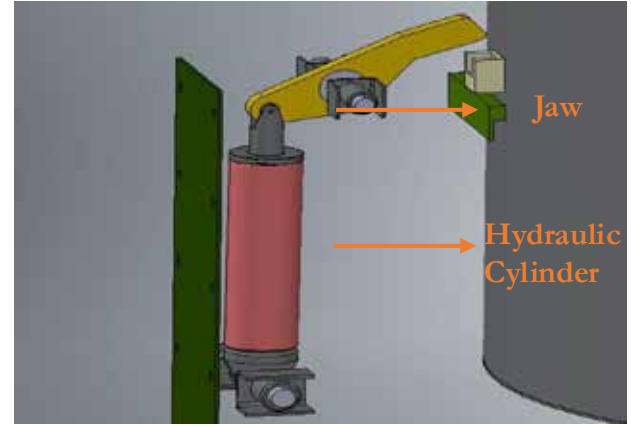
Jaw and Hydraulic Cylinder Mechanism
